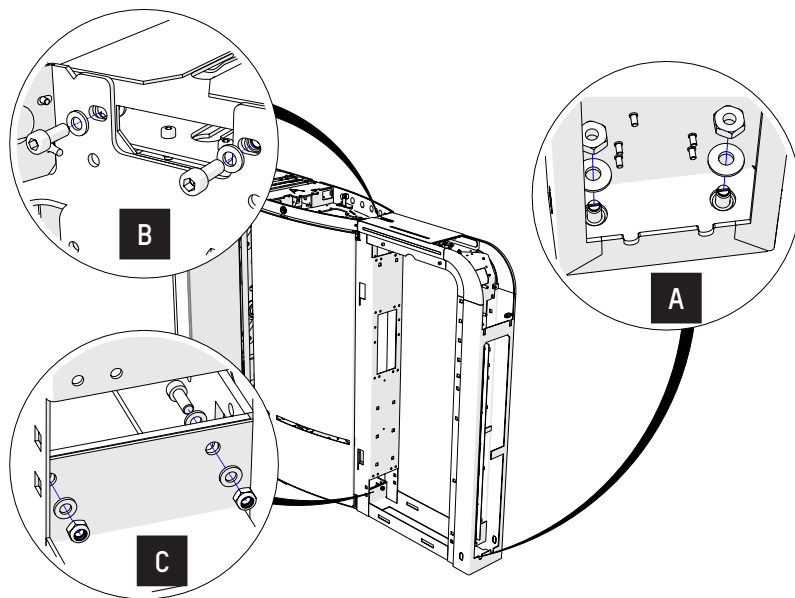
Housing extension with filler stainless steel panels fixing points
